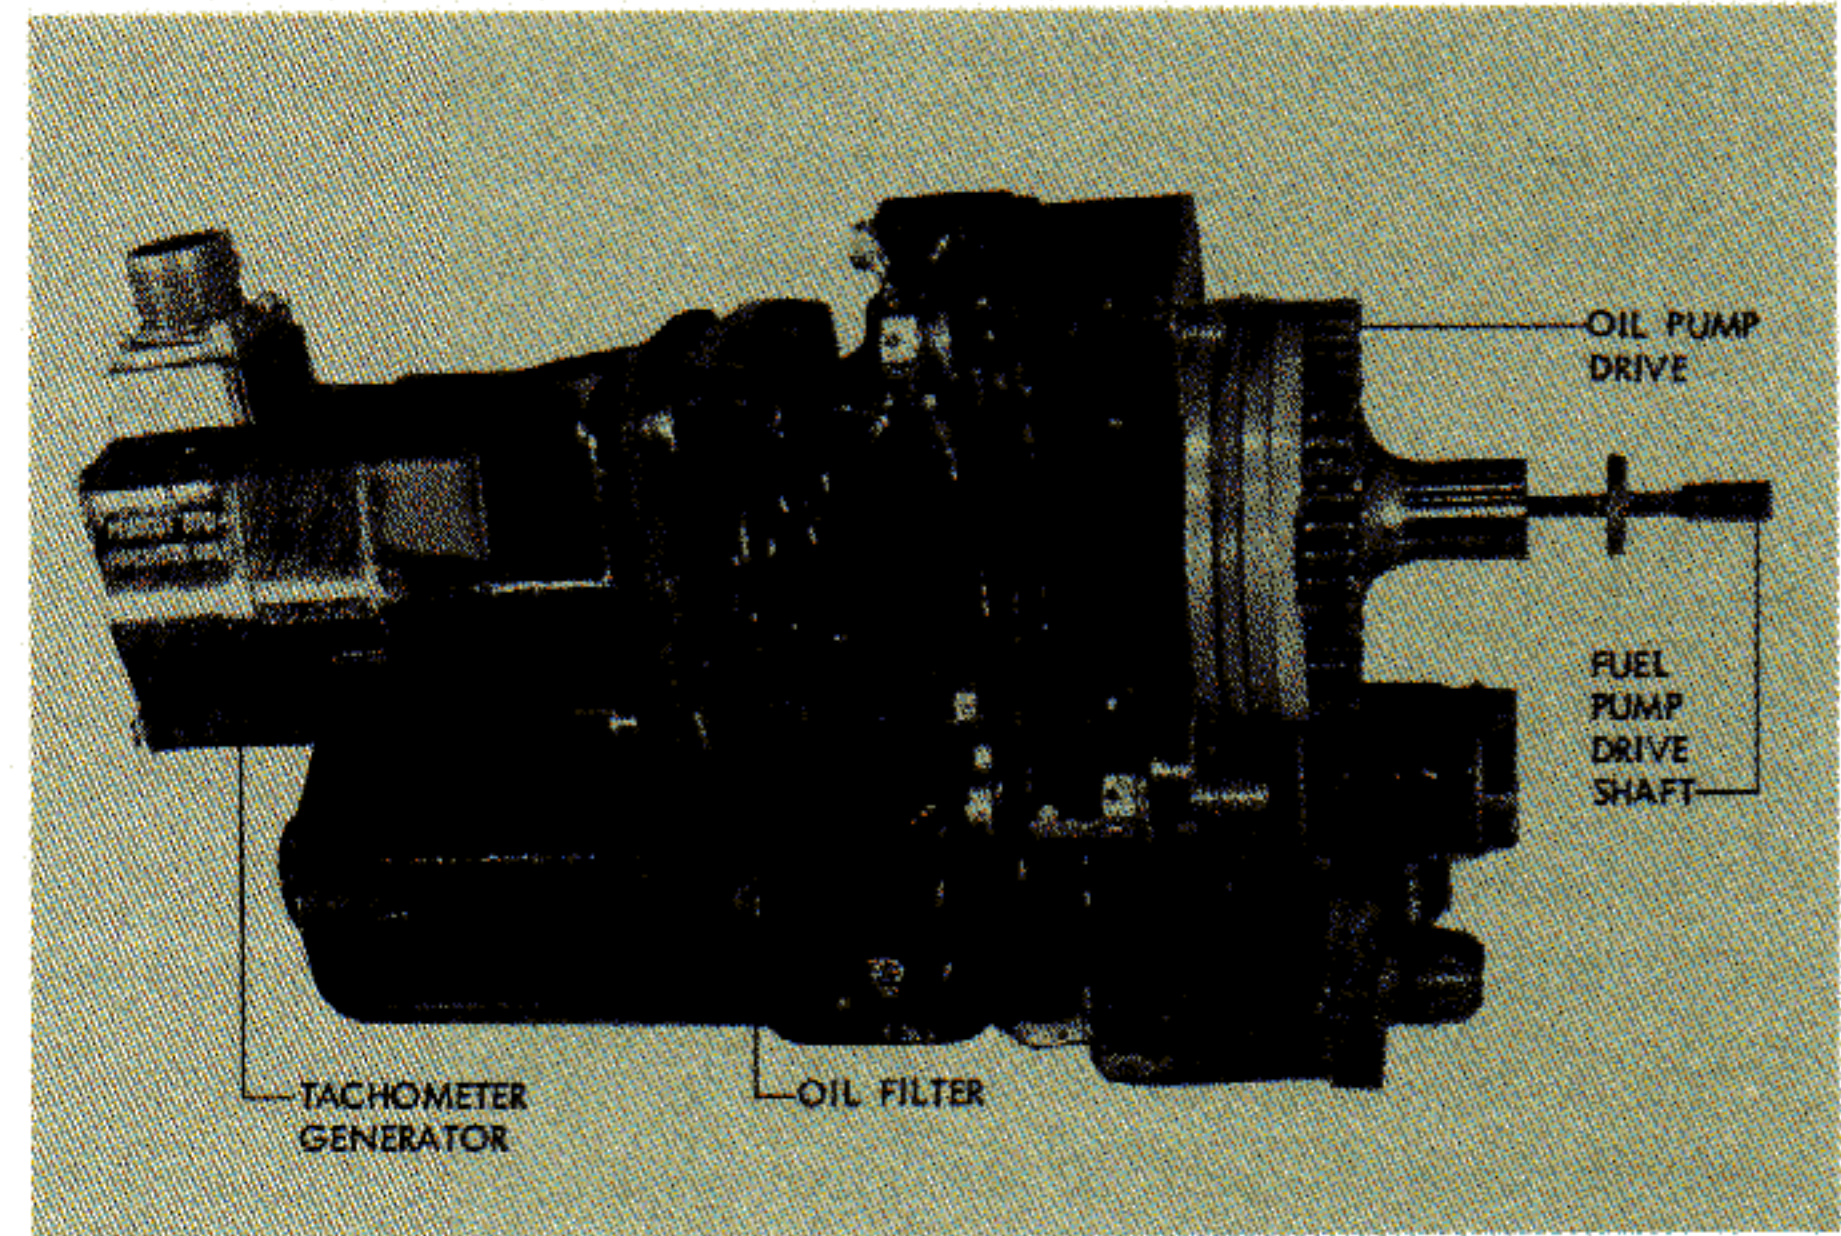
Oil Pump Assembly. APU tachometer generator is positioned on its mounting pad, but not installed.
